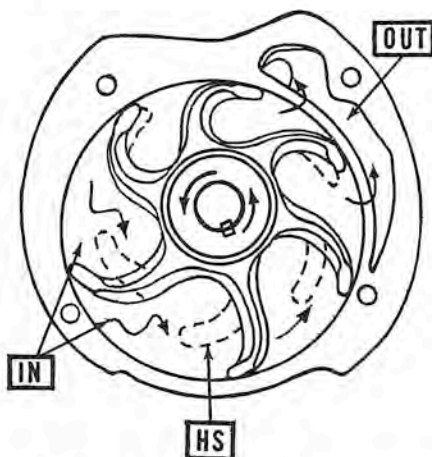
Schematic view of rubber impeller type water pump. Flexing of impeller blades in offset housing causes water to be drawn into pump through inlet ports (IN) and forced into power head through outlet ports (OUT). At high speeds, blades remain partially curved as shown by broken lines (HS) and pump becomes a centrifugal pump.
